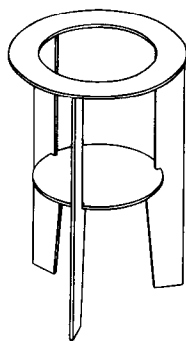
Disc-and-donut packing; welded stainless steel; diameter 10 cm (4 in); height 15 cm (6 in); 10 pieces were stacked in the stripping column.
